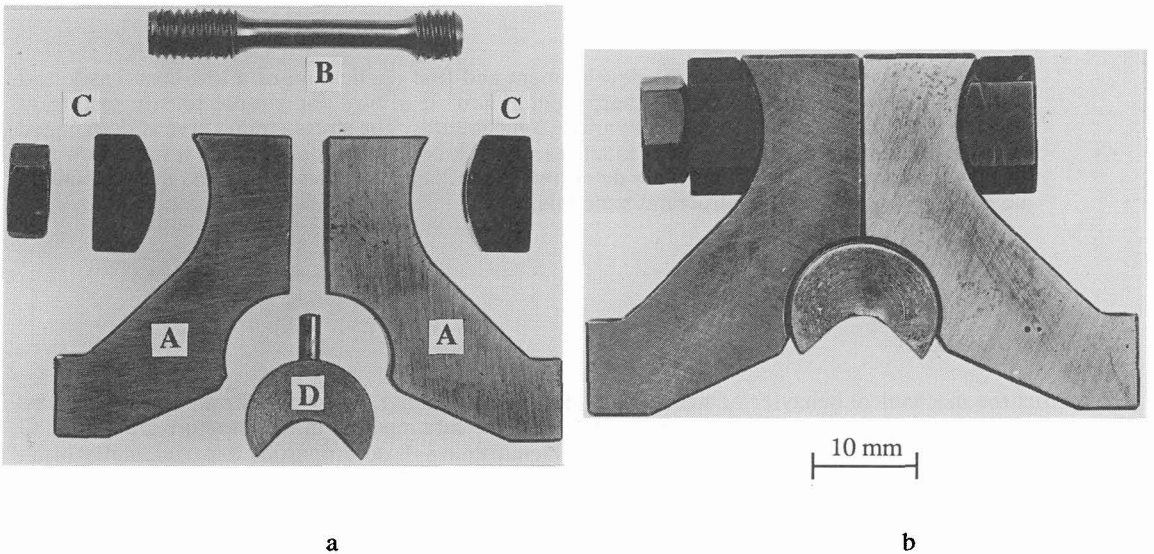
Clamping device for tensile tests at increased loading rates and various temperatures, a) exploded view, b) assembled view
